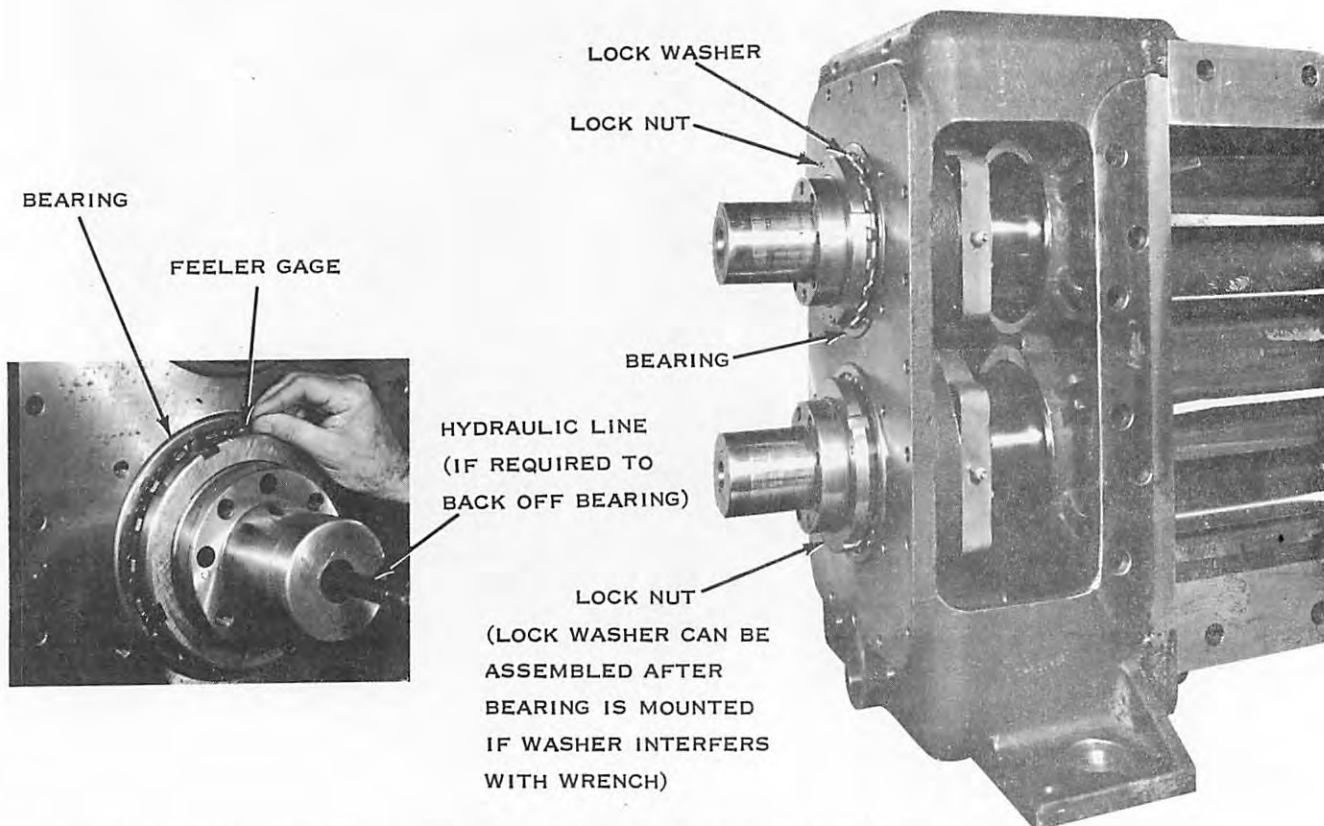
MEASURING BEARING DIAMETRAL CLEARANCE
